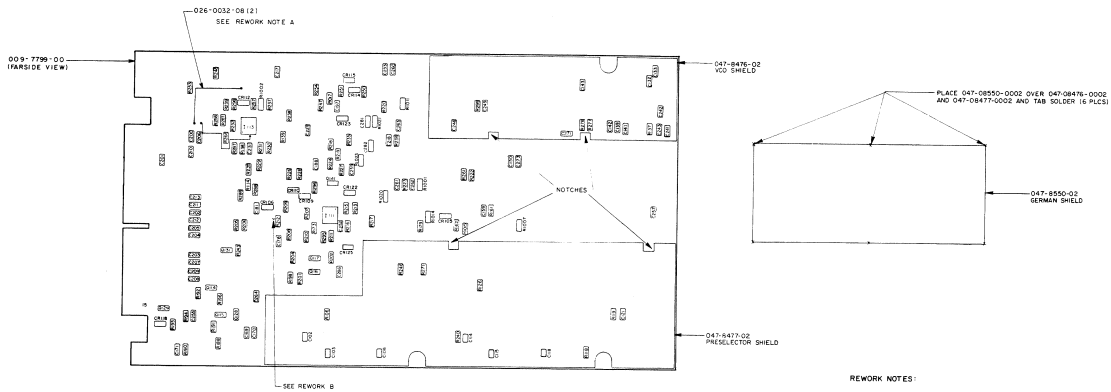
A KY 96A (28V) Main Board Assembly (Sht 2 of 2)
